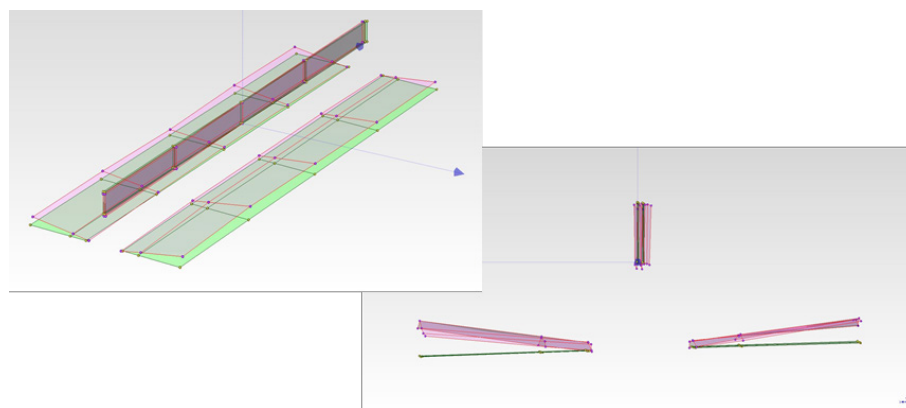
Distortions of the sample after welding with technological delay 25 s (green - before welding; red - after welding)
